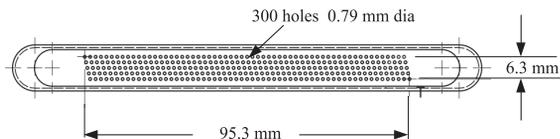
Holes are made in stainless steel plates which are then spot welded into slots in the beam-pipe wall.
